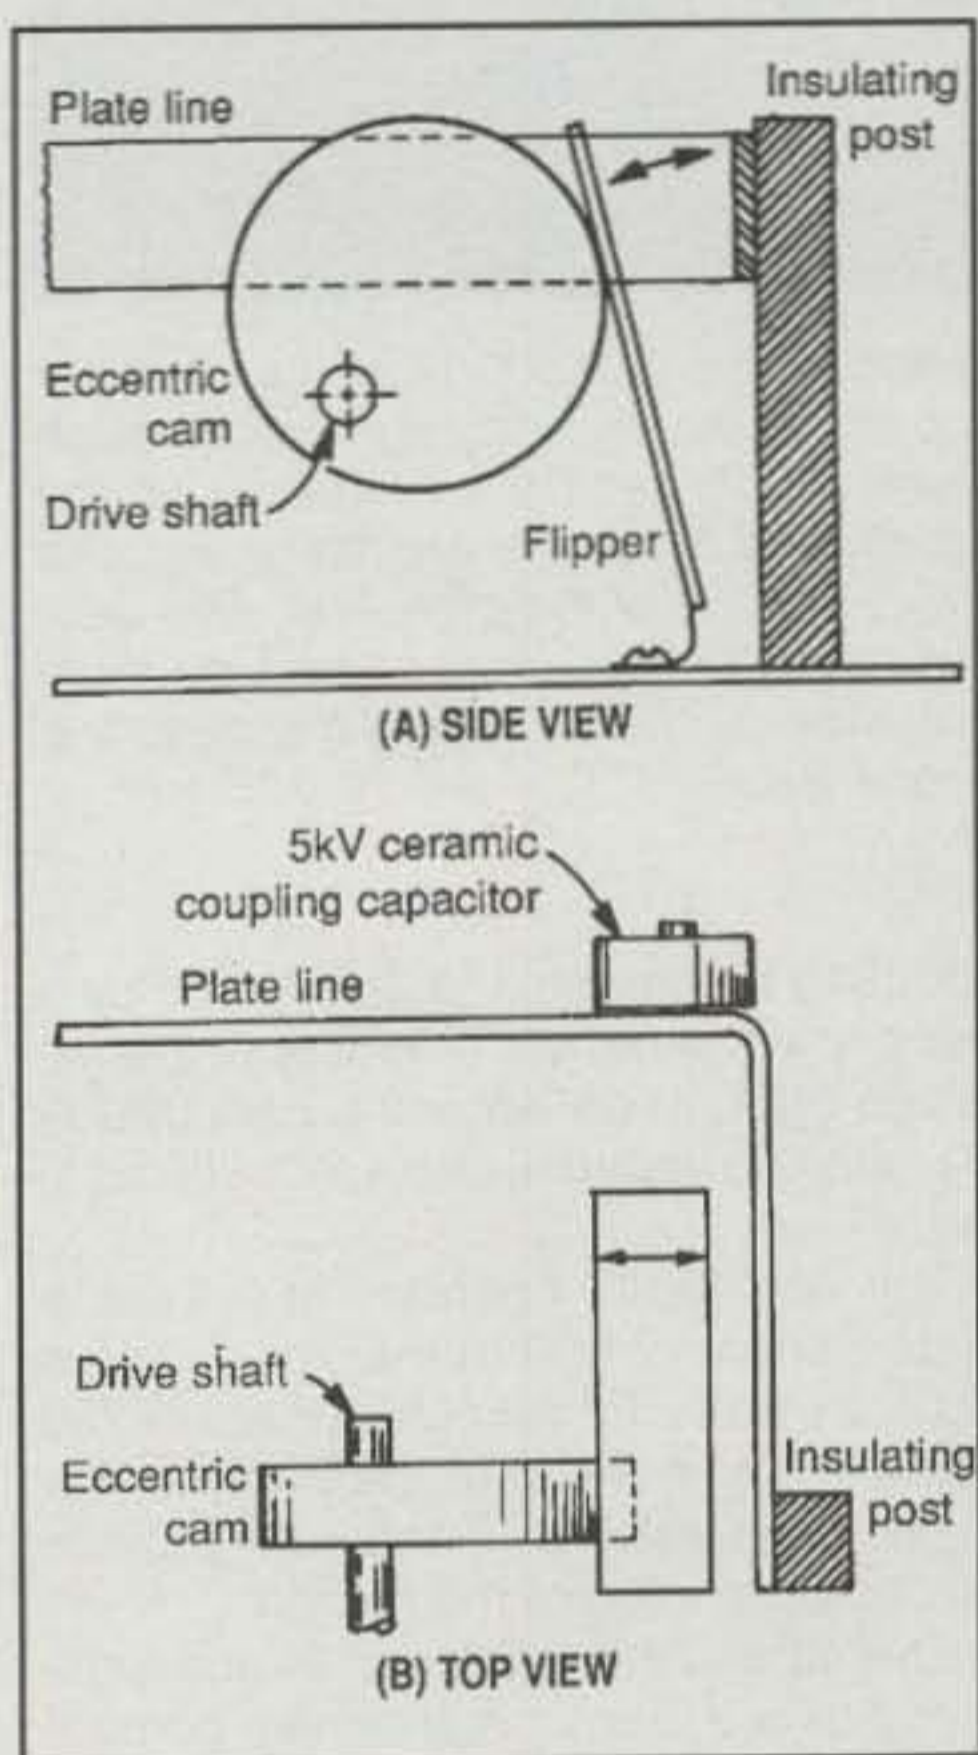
(A) Side view of plate tuning flipper showing eccentric cam which presses against the hinged flipper plate. Assembly is panel driven through a vernier unit. (B) Top view of plate assembly showing placement of main components.
